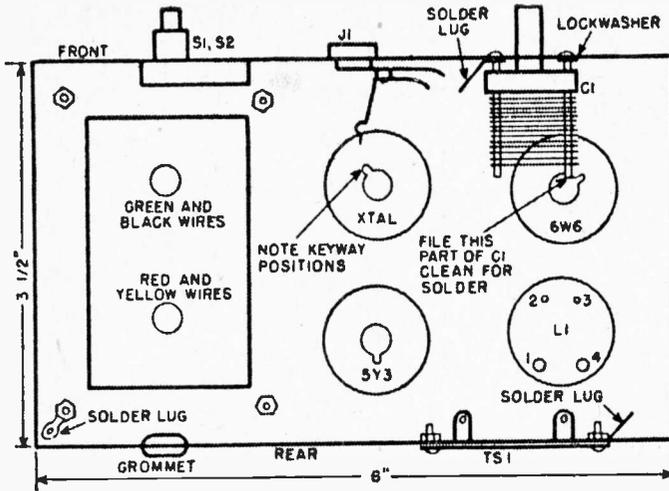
This bottom view of the chassis shows the placement and orientation of the most important parts of the transmitter.
